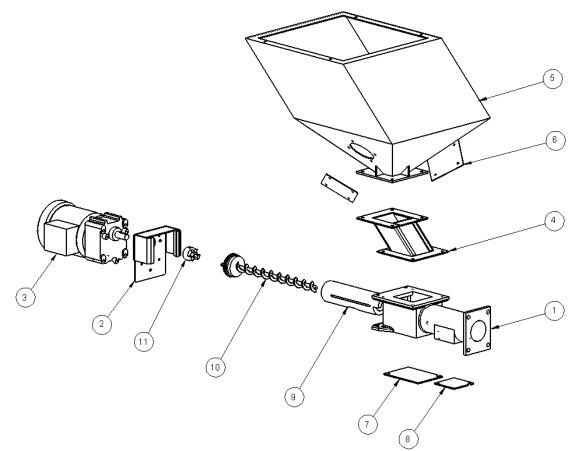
Typical Additive Feeder Hopper Assembly Parts List
